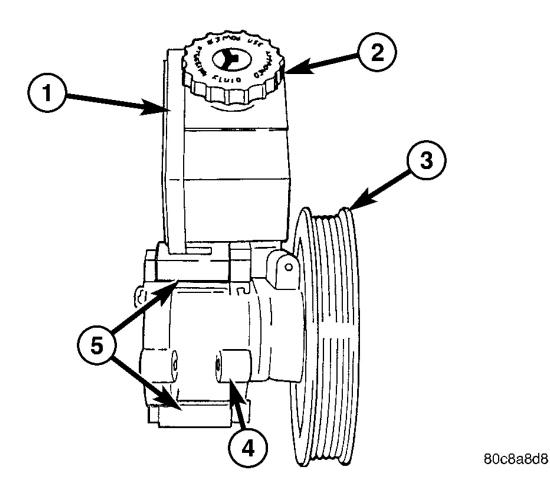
Power Steering Pump Assembly Courtesy of CHRYSLER LLC
